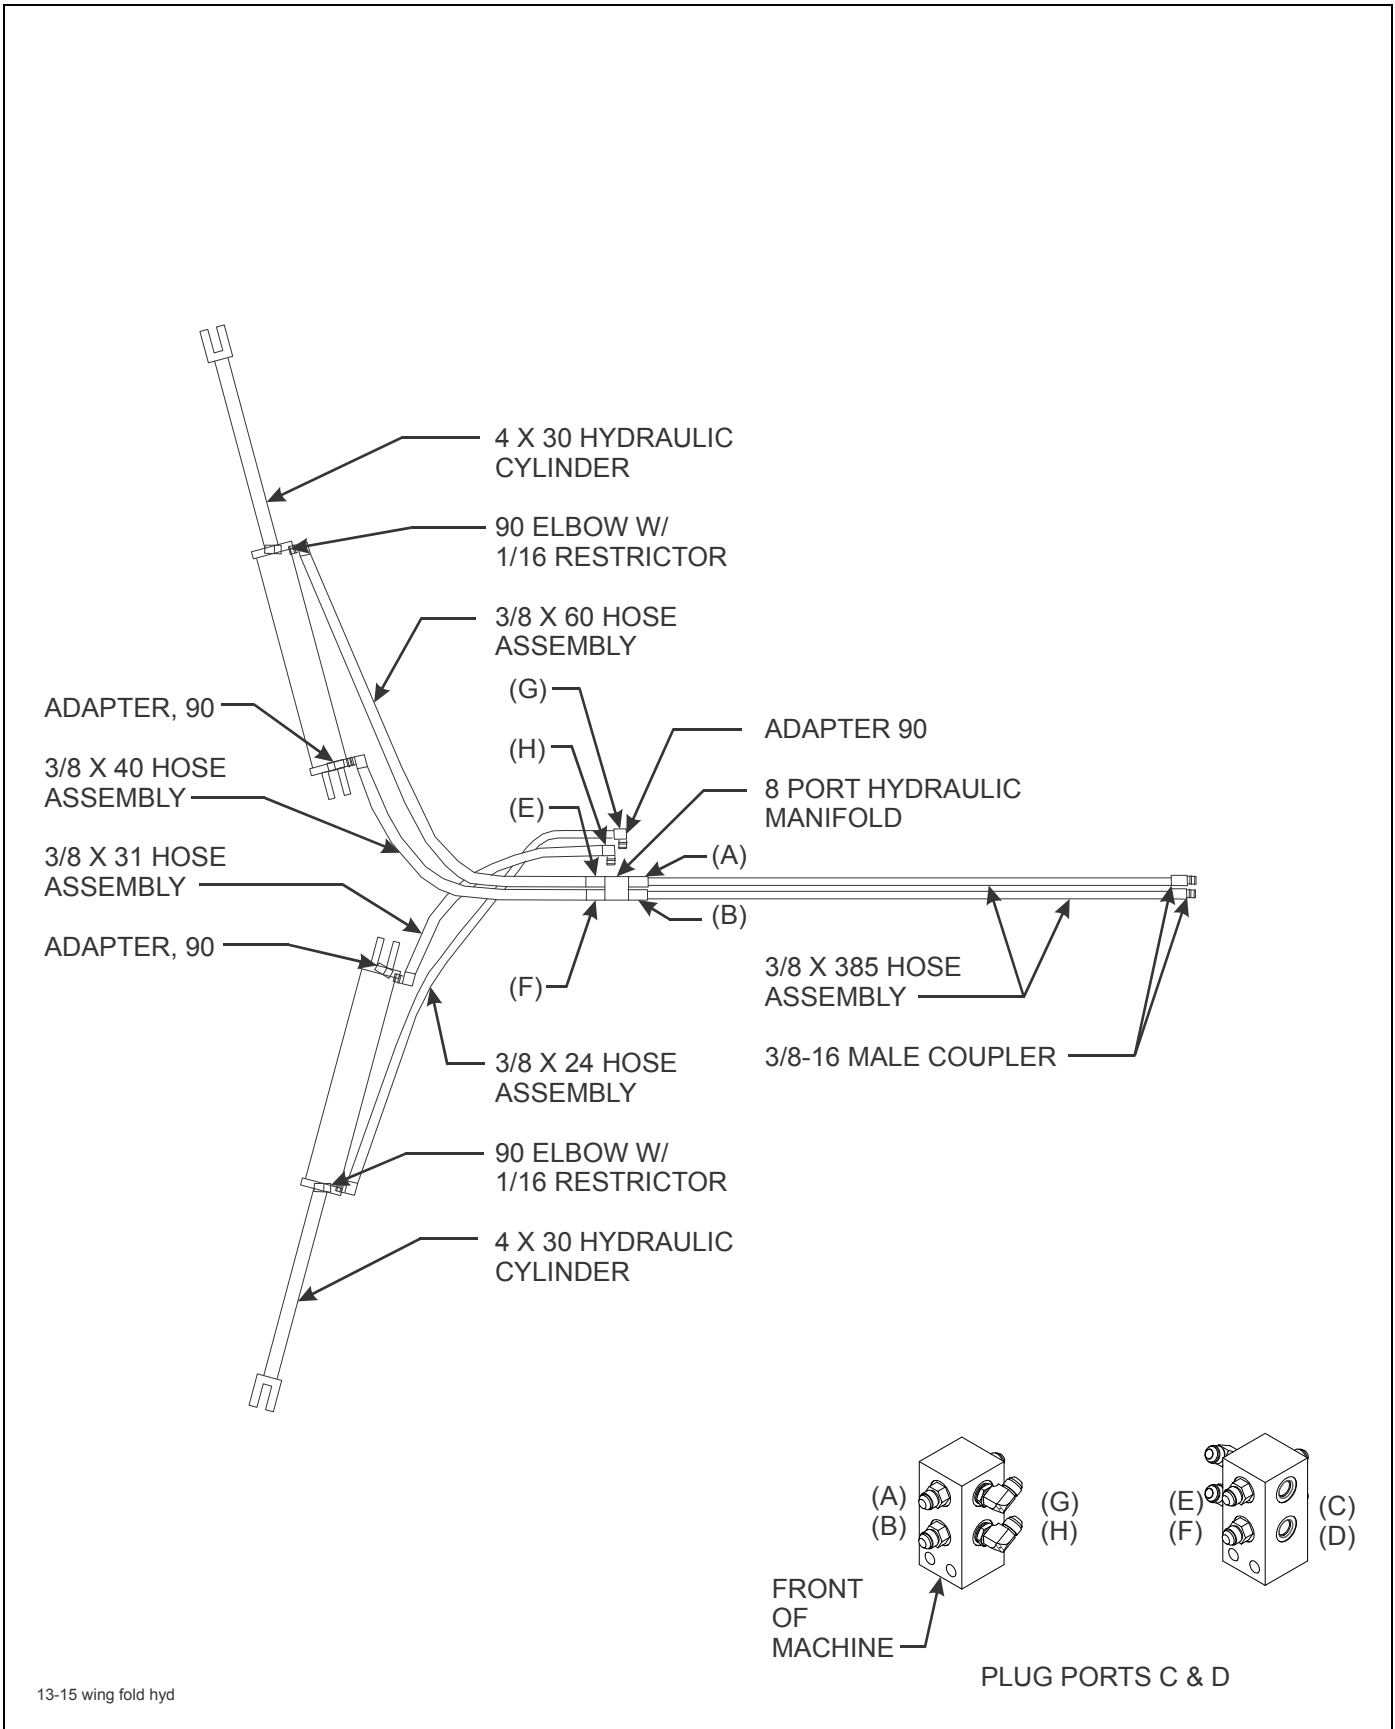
Wing Fold Hydraulic Installation (2211-13 & -15)
